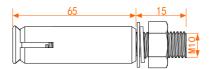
Dimensions of Expansion Bolt Set for Concrete Wall (unit: mm)
